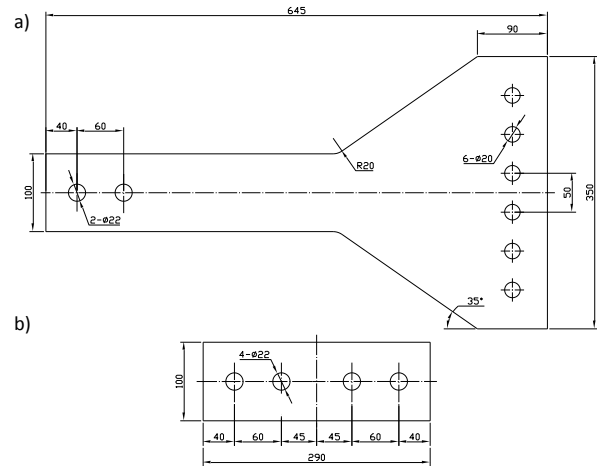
(a) Inner plate; (b) cover plate. Dimensions in mm.
